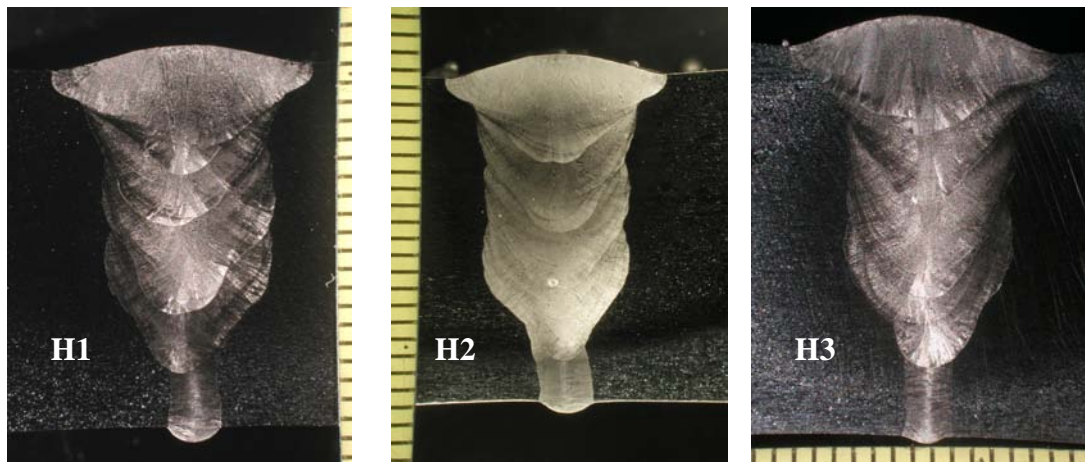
Welds from the test series A (from left to right): Weld H1, Weld H2 and Weld H3.
